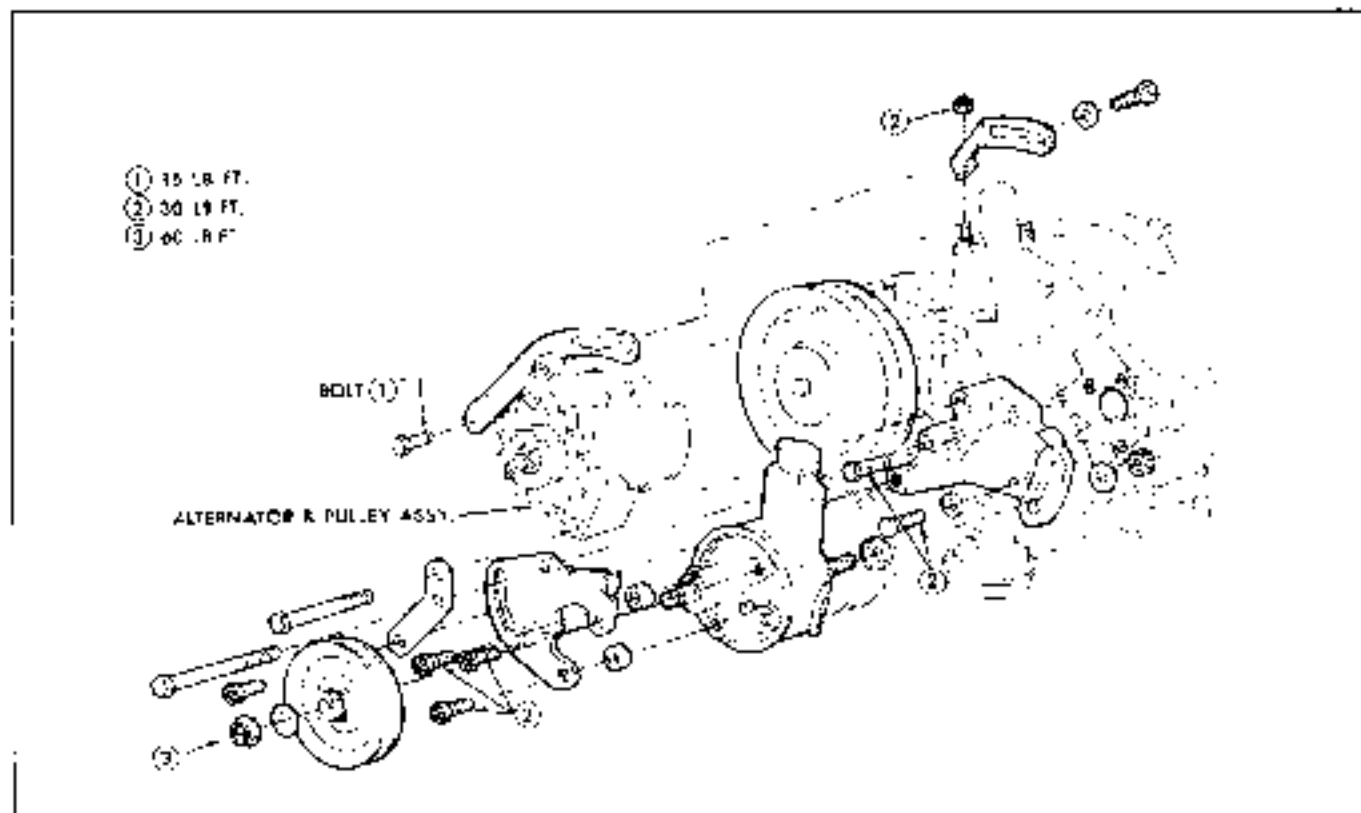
Installation of Power Steering Pump for V8 Engine.
